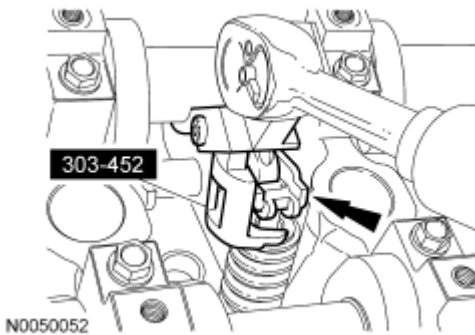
Compressing Valve Spring & Removing Valve Spring Retainer Keys Using Special Tool (303-452)
